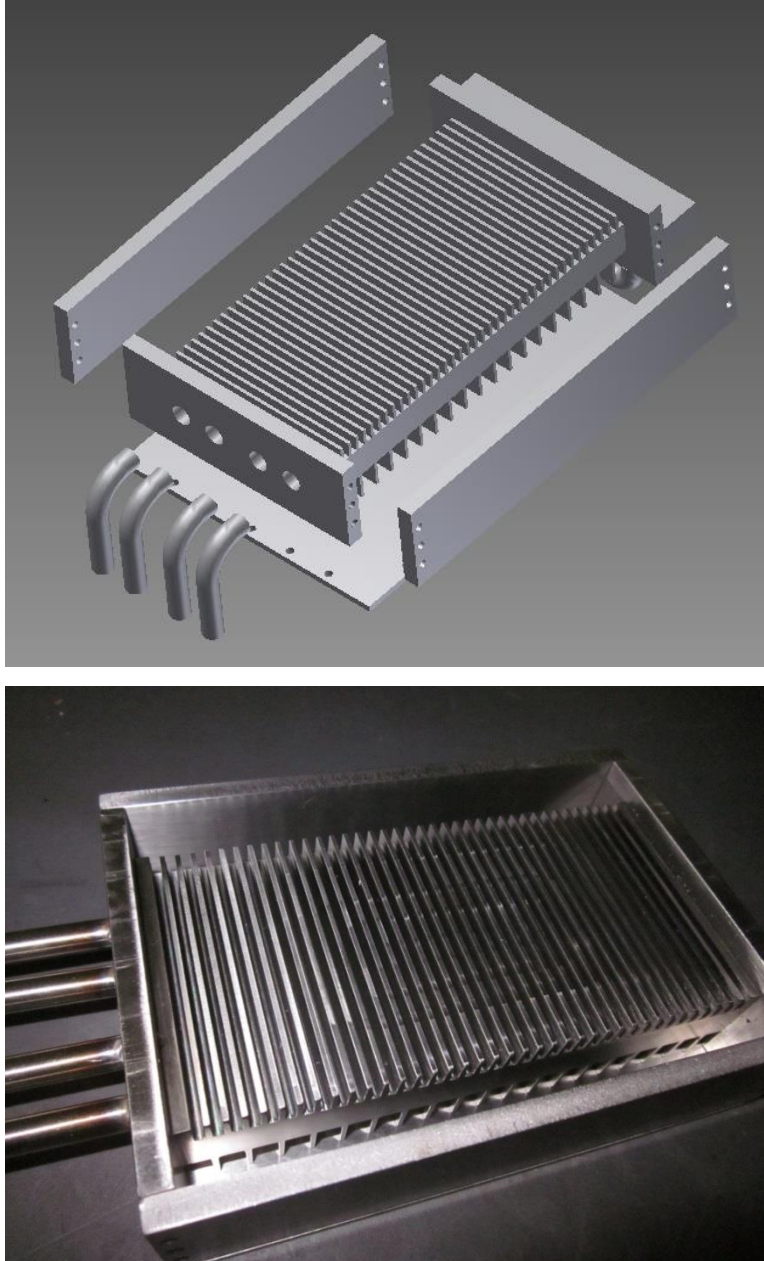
CAD drawing and assembled picture of the second version LiMIT trenches for SLiDE experiment. Detail of CAD drawings can be find in the appendix (Figure A.4 to Figure A.9)
